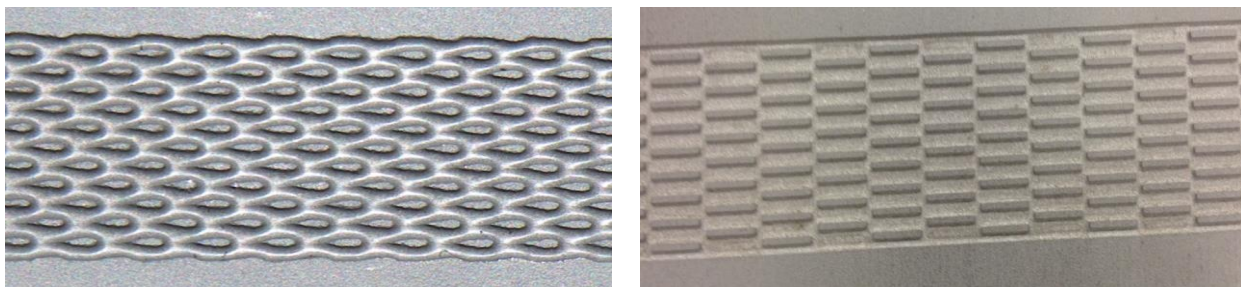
Images representing a section of the 4.1mmNACA0020 airfoil fin (Left) and rectangular Offset fin (Right) geometry heat exchanger plates. Detail design and measured dimensions of the geometrical parameters for each of these plates is provided in Tables (9) and (11).
